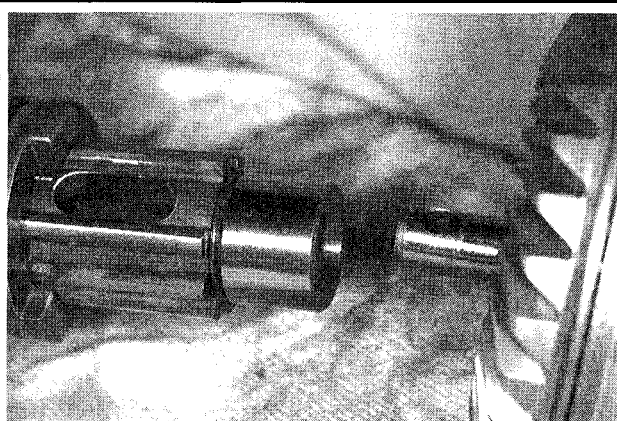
When the shift shaft is installed to the propeller shaft, be sure to align the shift shaft pin hole with the slot in the propeller shaft (clutch dog removed for clarity)
